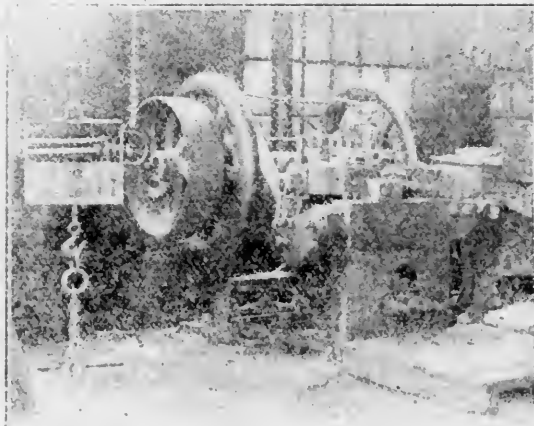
FORGING MACHINE AND CHUTE ON THE FLOOR, FOR WEIGHING BOLTS.
